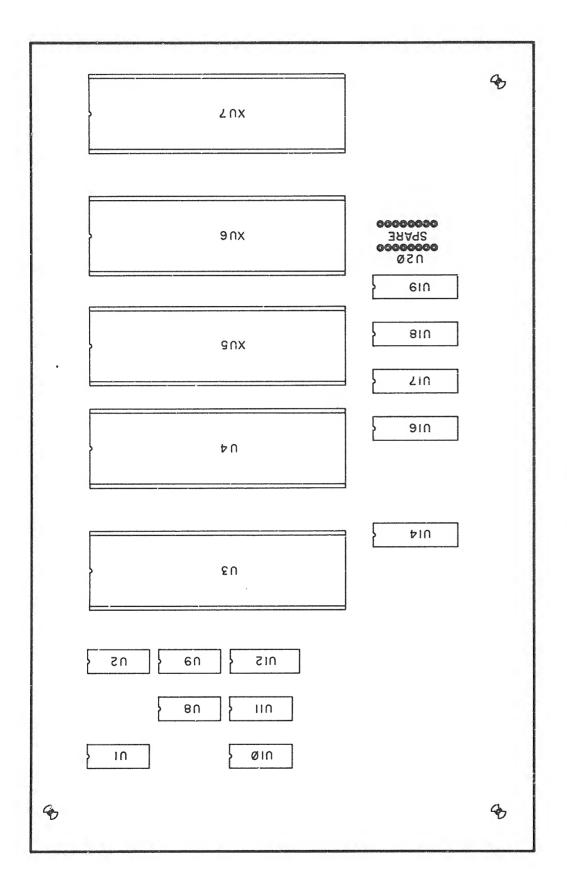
Daughter Board Parts Location (Sheet 1 of 2)
